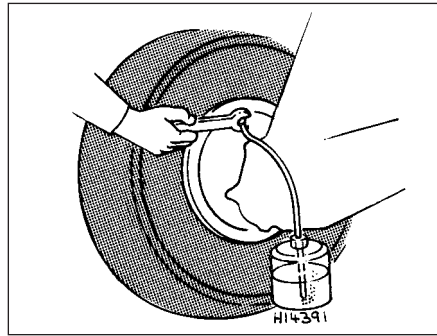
Bleeding a rear wheel cylinder (Sec 12)
